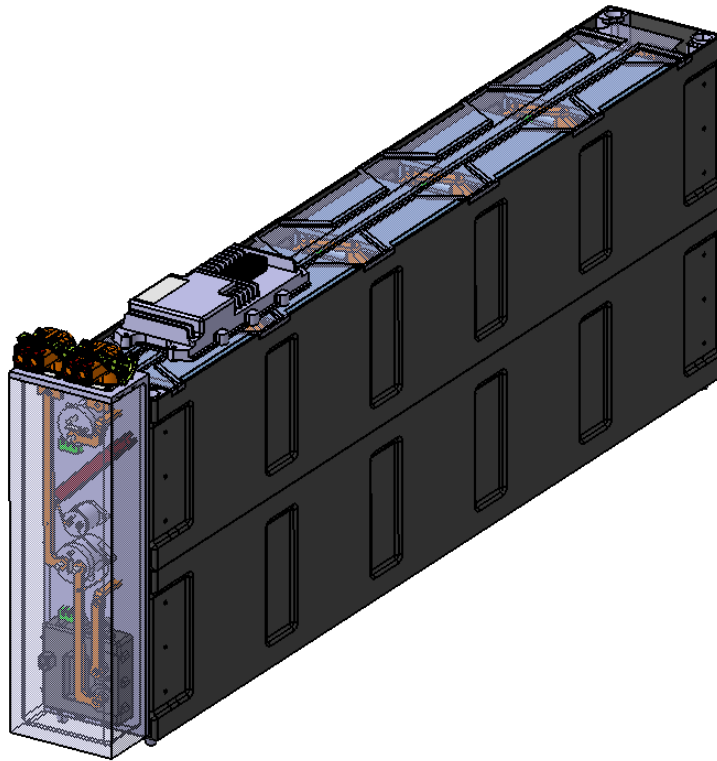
Packaging Design - Complete Battery Pack Right Side View
